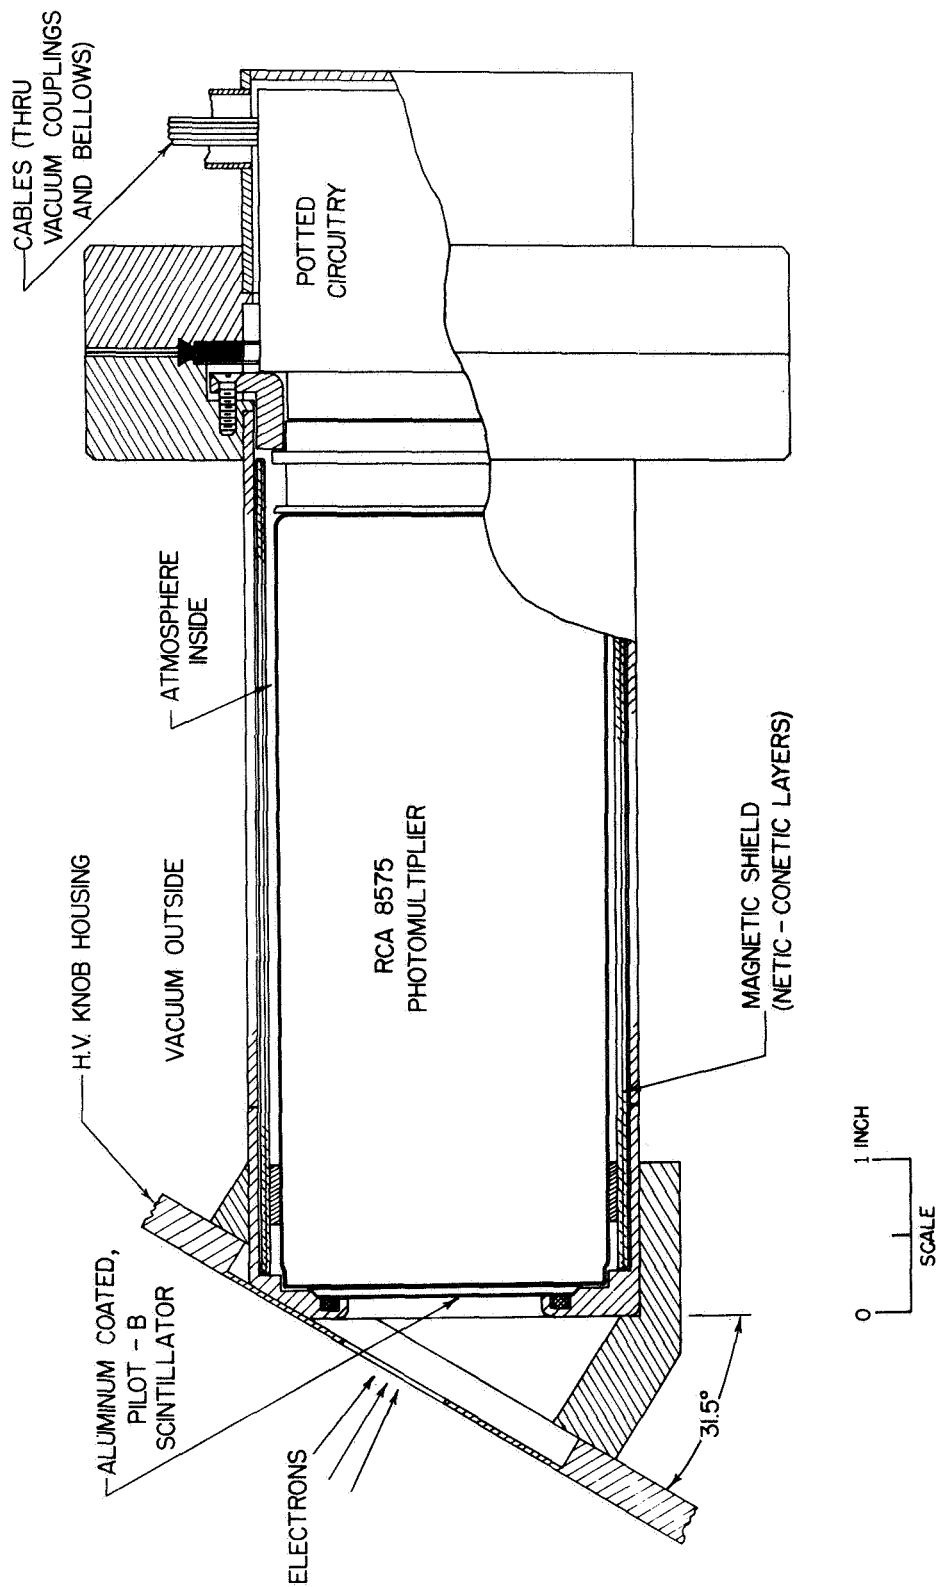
Cross-Section View of Photomultiplier-Scintillator Assembly.
